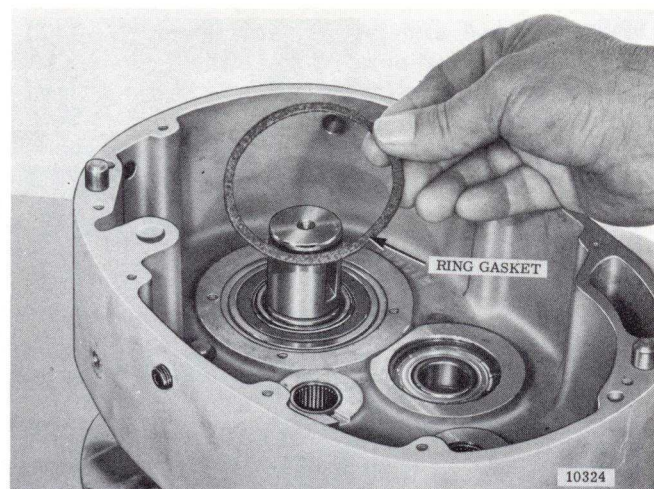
Removing Sprocket Bearing Ring Gasket
